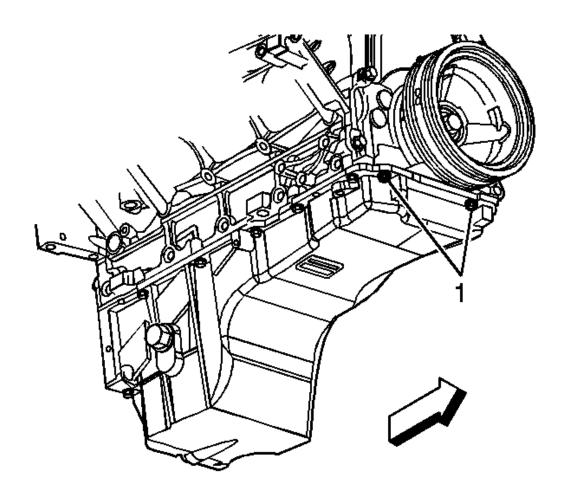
View Of Oil Pan-To-Front Cover Bolts Courtesy of GENERAL MOTORS CORP.
